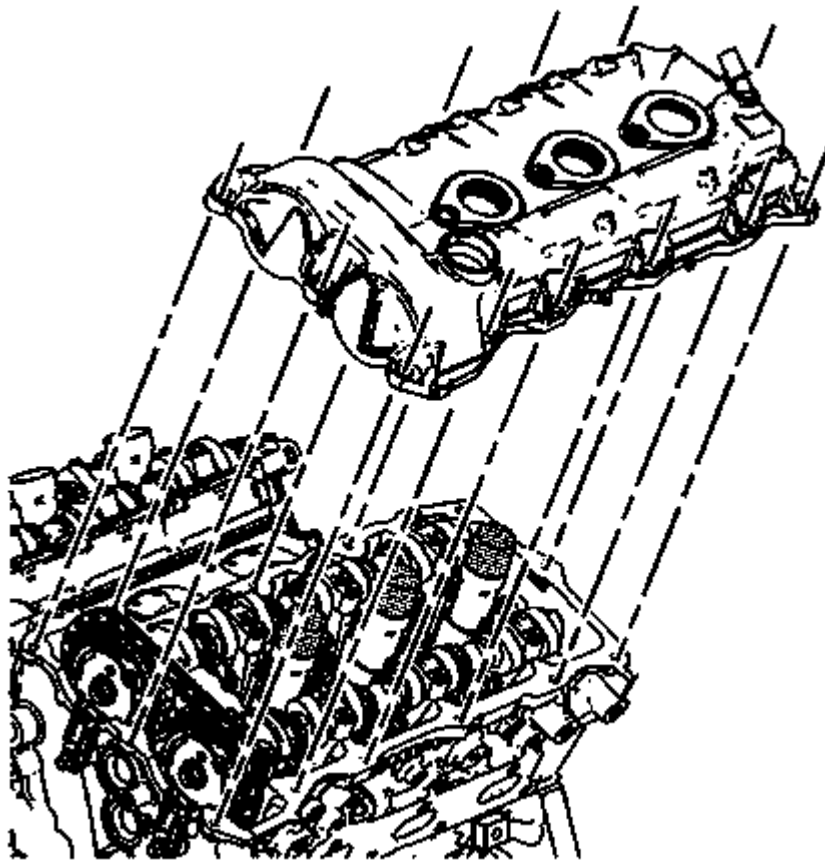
Aligning Left Camshaft Cover On Left Cylinder Head
